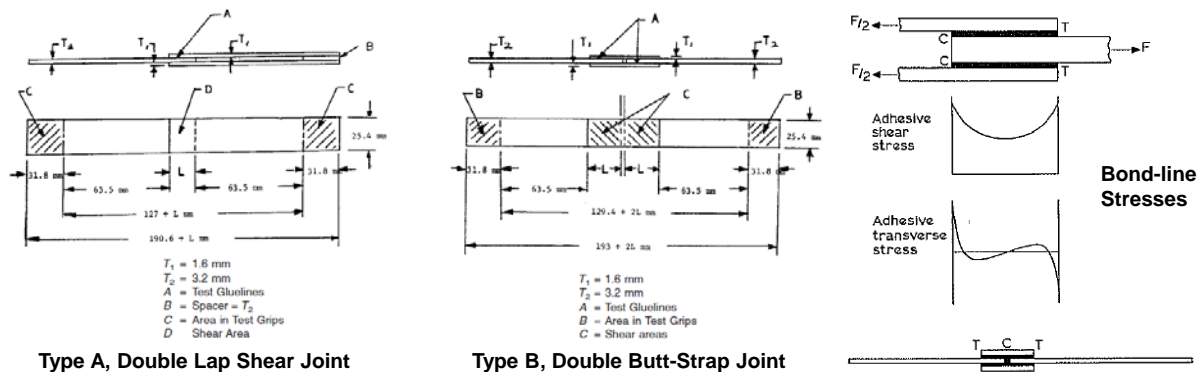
ASTM D3528 Adhesively Bonded Double Lap Shear Specimen, Type A and B.
